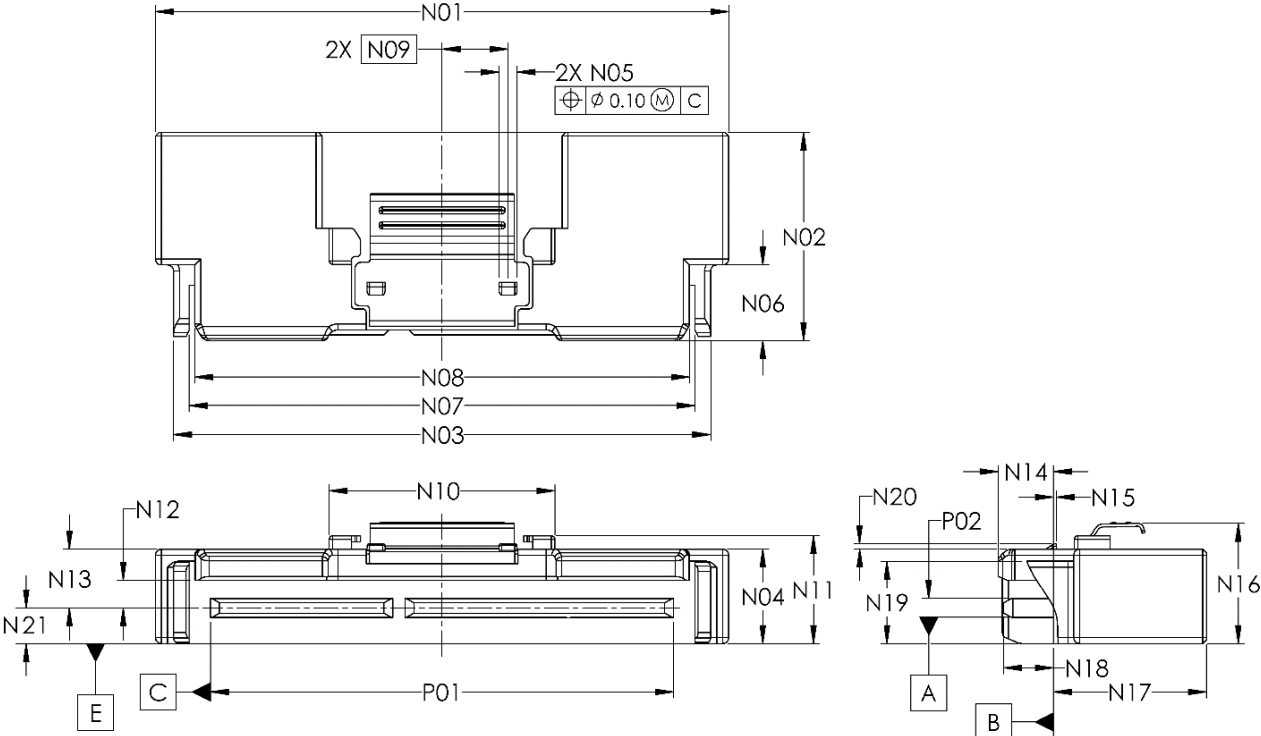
Straight Plug with Side Anti-skew Flanges for 124 Contacts
